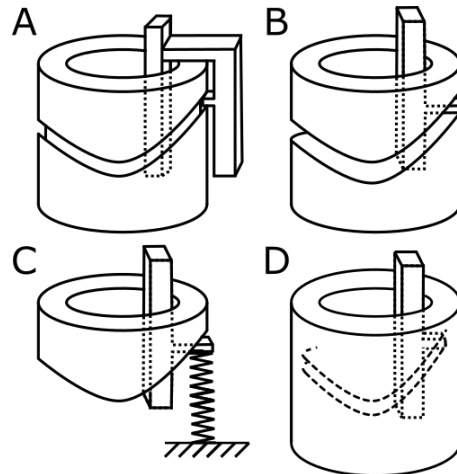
Schematic representation of different cam designs. A: Regular barrel cam with a hole. B: Two halves cam. C: Half cam with springs. D: in-side-out cam
